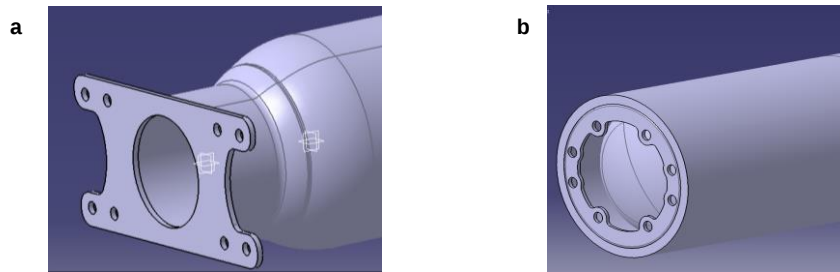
Previous CM versions, (a) CM with a round reinforcement which is welded to a mounting plate, (b) CM with large diameter reinforcement equal to the mandrel and bolts inside the circumference
